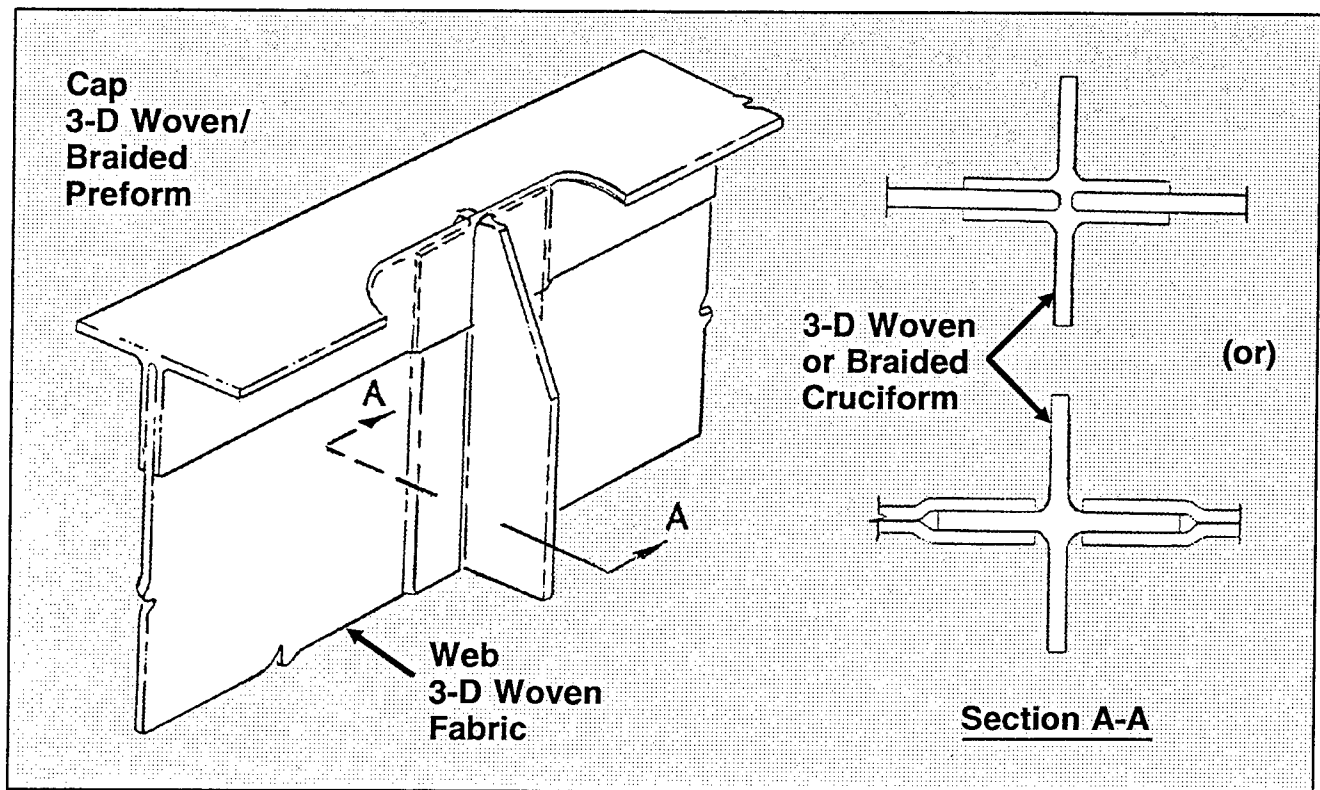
Configuration for Underfloor Frame Built with Woven and Braided Preforms
